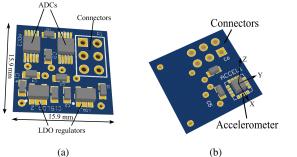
Sensor module printed circuit board: (a) top (b) bottom views.
